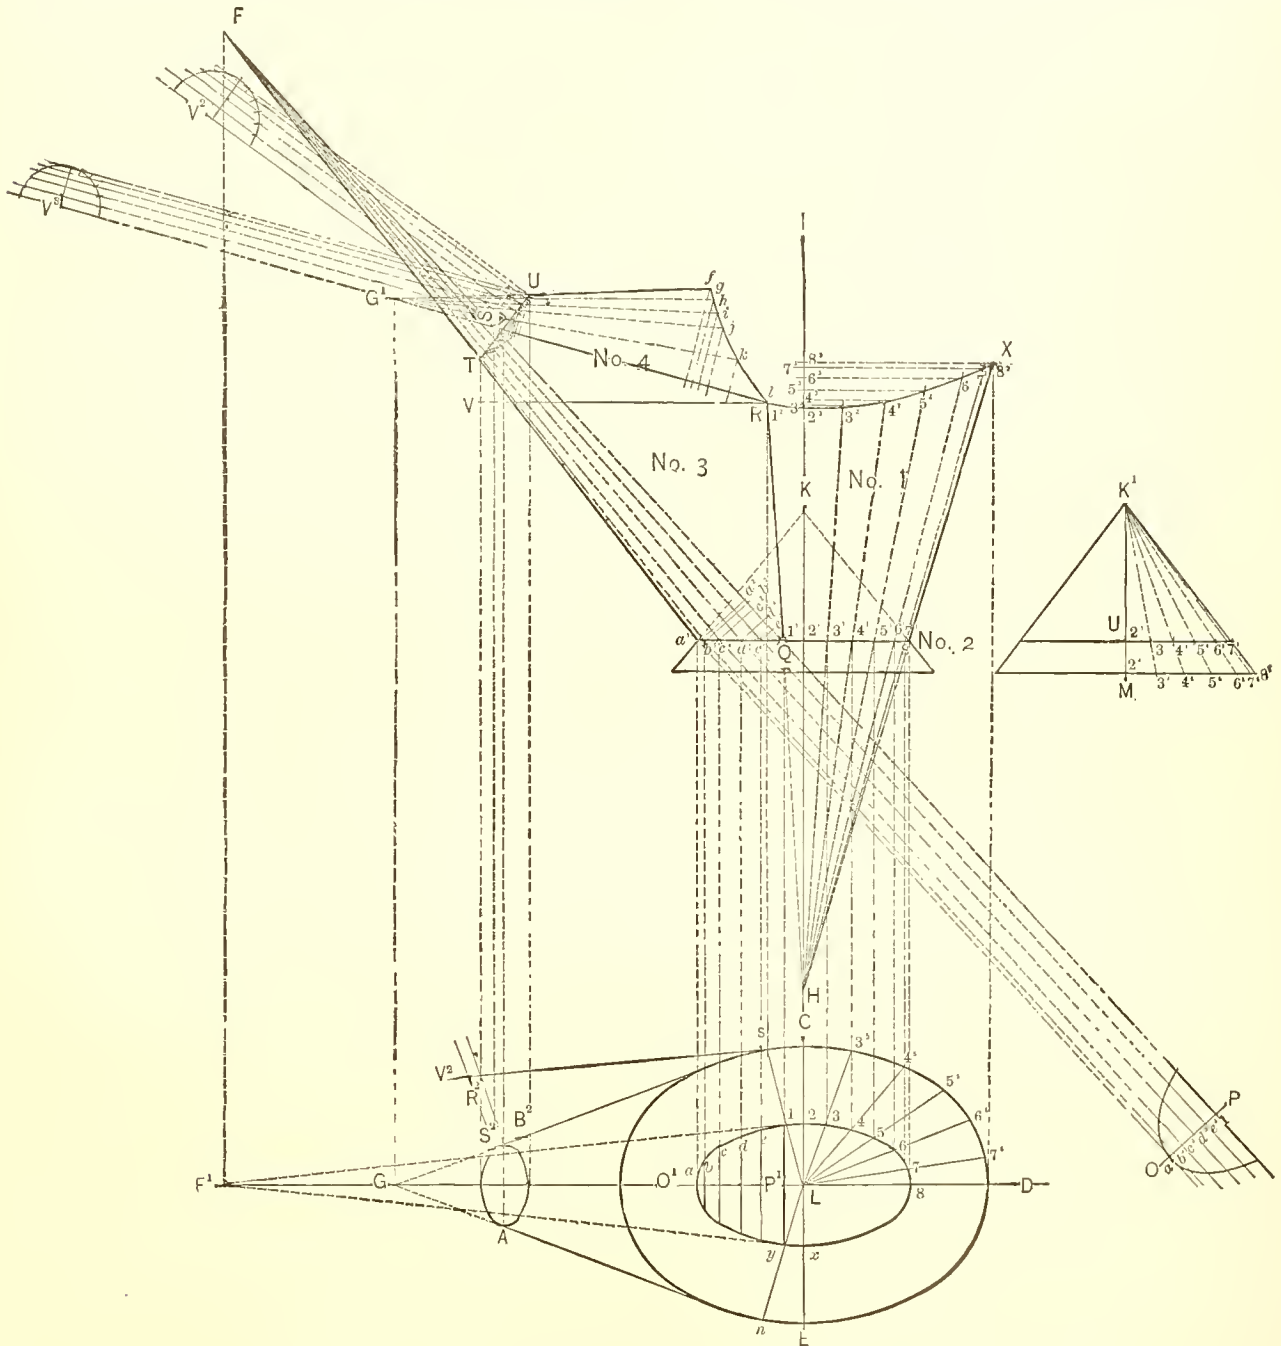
Patterns of a Coal Hod.—Elevation, Plan at Line of Foot, and Section near Top.
